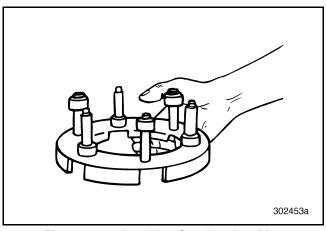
Synchronizer Pins and Sliding Clutch Temporarily Assembled to Show "R" Marks
